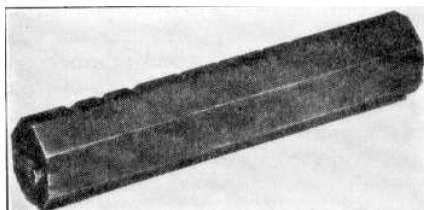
Finishing tool for 8 candle power lamp filament
